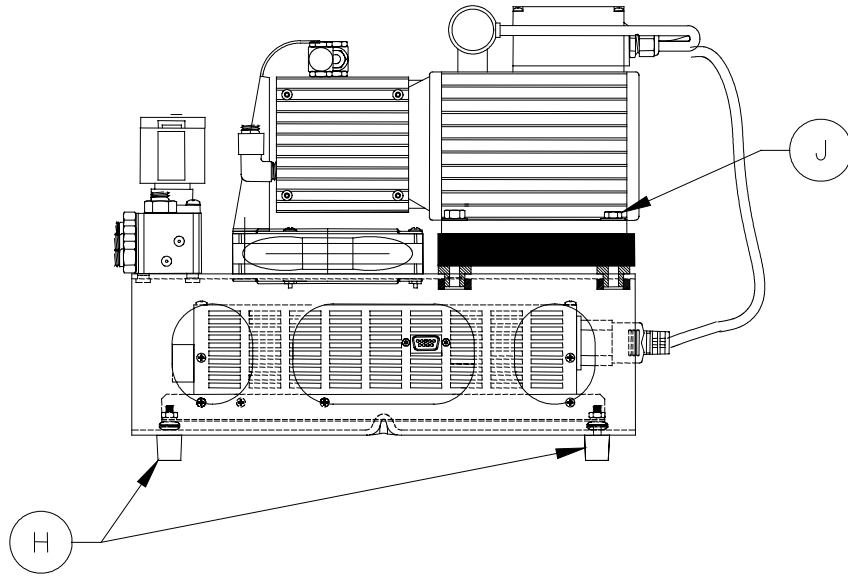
Diaphragm pump assembly shown with new chassis and fan.
